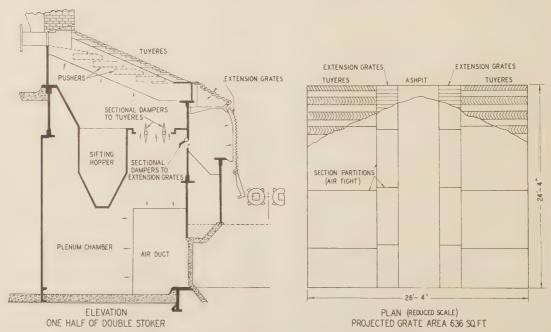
Sectional Damper System and Fuel-Bed Subdivisions for Original 29-Tuyère Stoker at Beacon Street Heating
